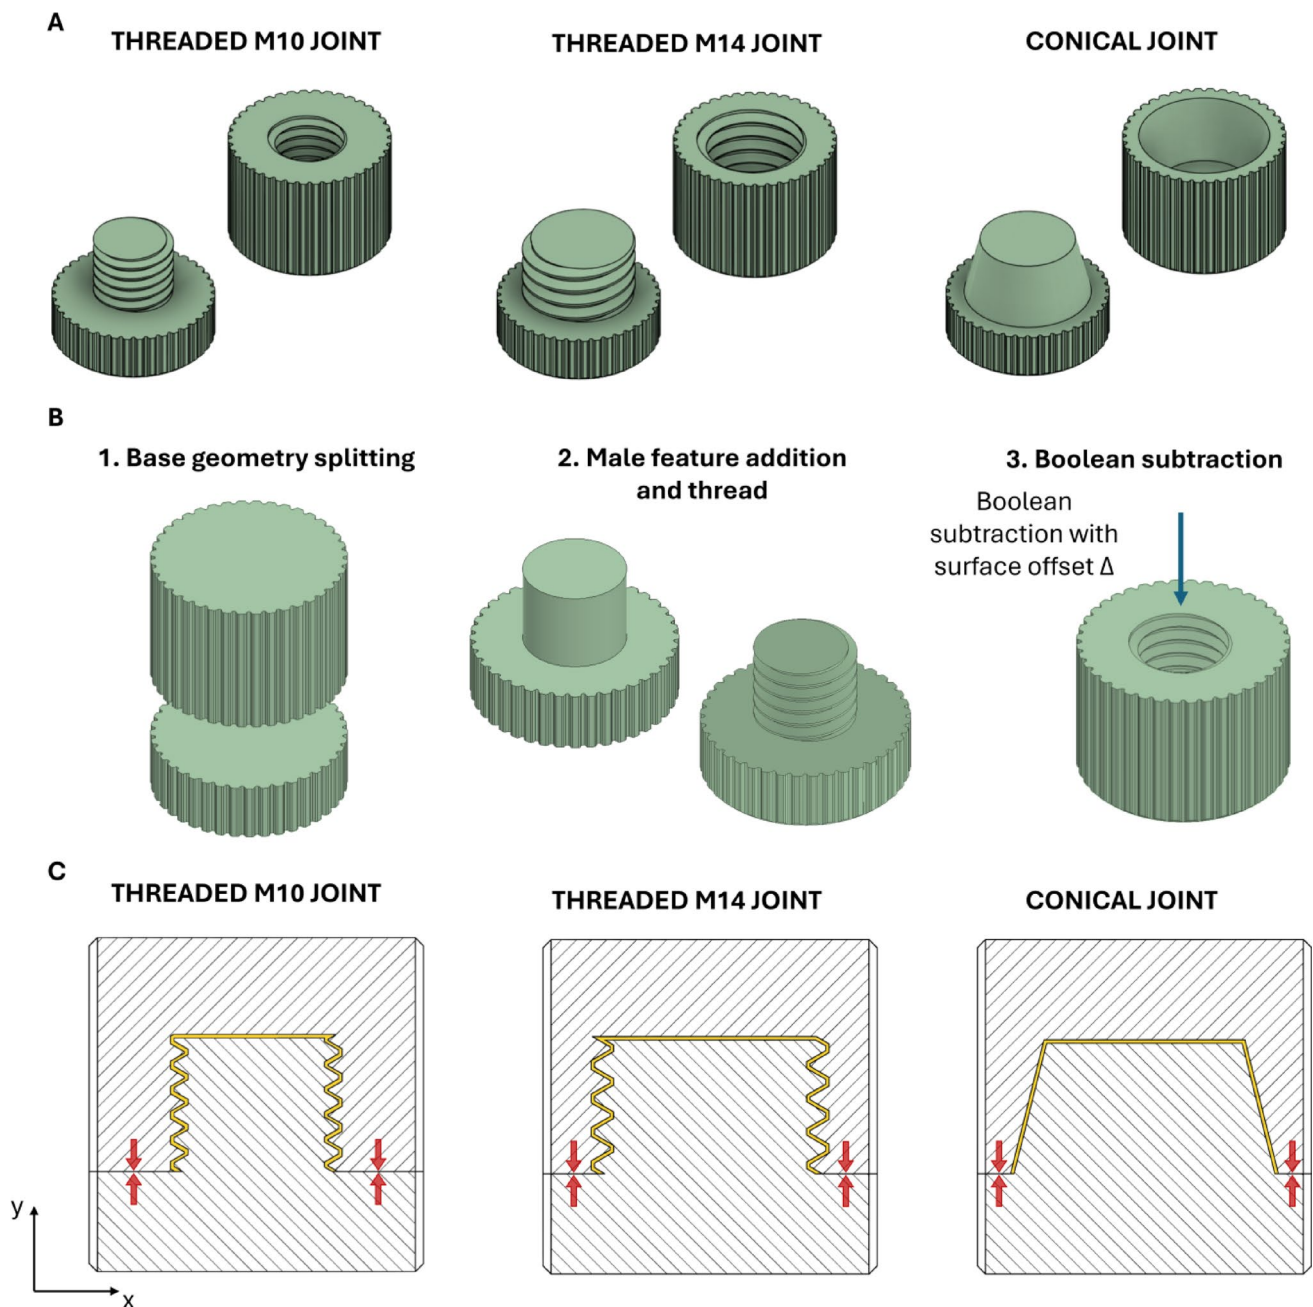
Schematic representation of the investigated cylindrical joint geometries and parametric design workflow. A The three cylindrical joint configurations considered in the study are a threaded M10×1.5 joint, a threaded M14×2 joint (ISO metric profiles), and a truncated conical joint (76° cone angle). In all cases, two complementary green parts (part A and part B) are generated from an initial Ø20 mm x 20 mm (h) cylinder with external knurling. B Parametric design workflow for
